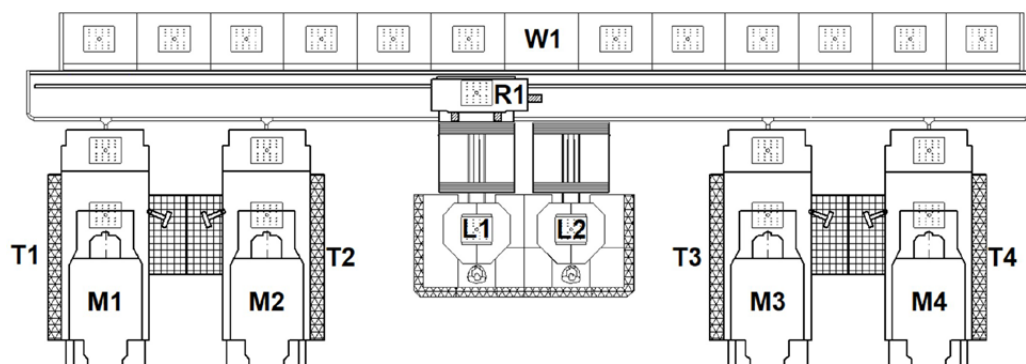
A scheme of the analyzed FMS; M1 – machine 1, M2 – machine 2, M3 - machine 3, M4 – machine 4, R1 - robot, L1-L2 – loading & unloading stations 1&2, W1 - pallet warehouse, T1-T4 – tool magazines 1-4
